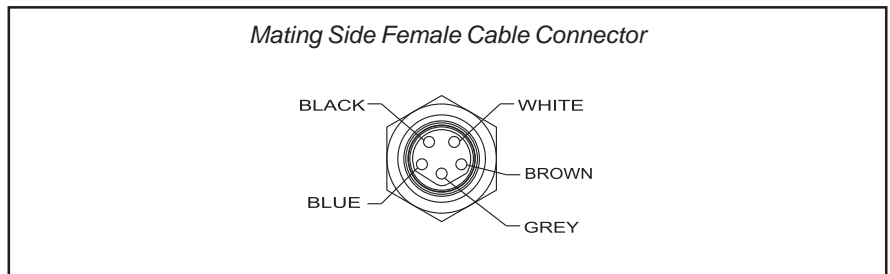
M8 Female Mating Cable Connector Pin Layout
